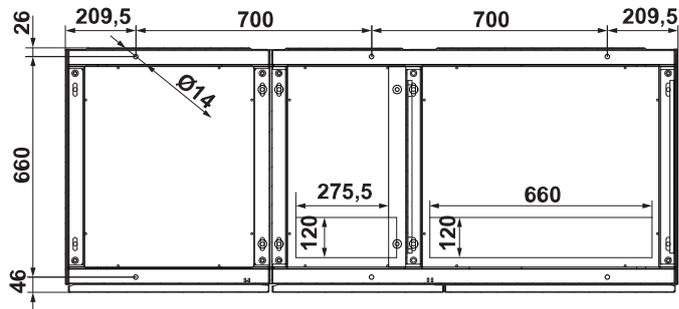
DETAIL FLOOR FIXING & OUTPUT WINDOWS FOR CONNECTION : A-A
